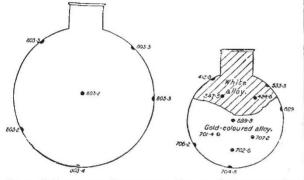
Gold 77'5 parts, silver 7'5 parts, FIG. 11.—Gold 63 parts, silver zinc 15 parts ; weight 3'930 kilograms. 7 parts, lead 20 parts, zinc 7 parts, lead 20 parts, zinc 10 parts.
